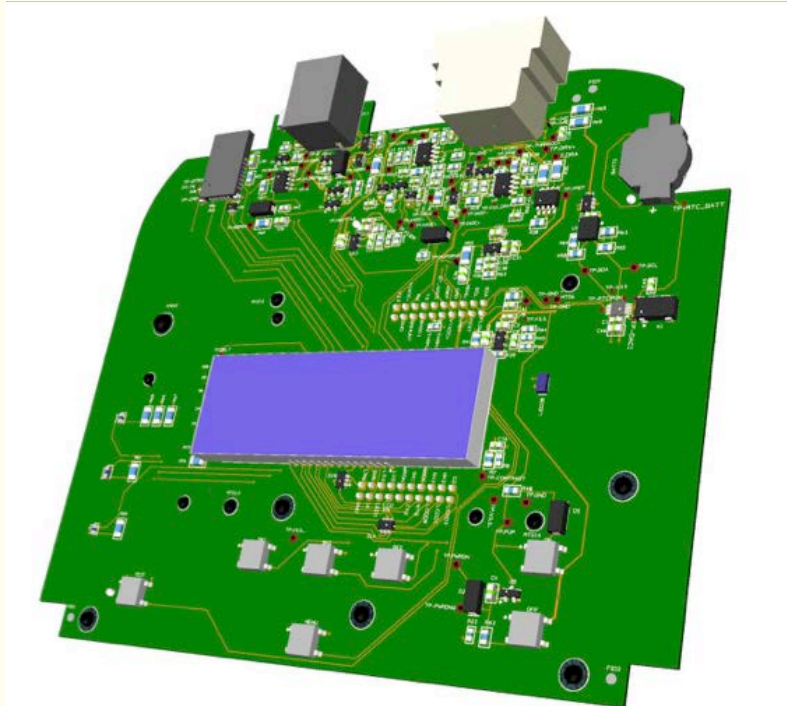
Shown above is the front of the custom printed circuit board (PCB).
